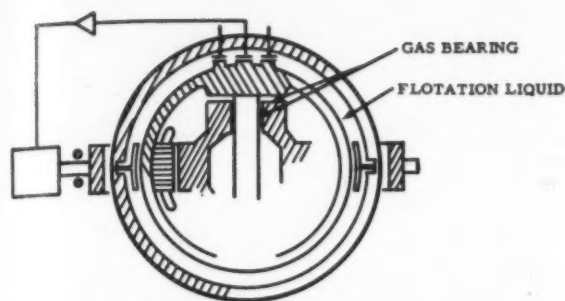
CONVENTIONAL TYPE OF GYRO with gas-lubricated bearing replacing ball type spin bearings.
